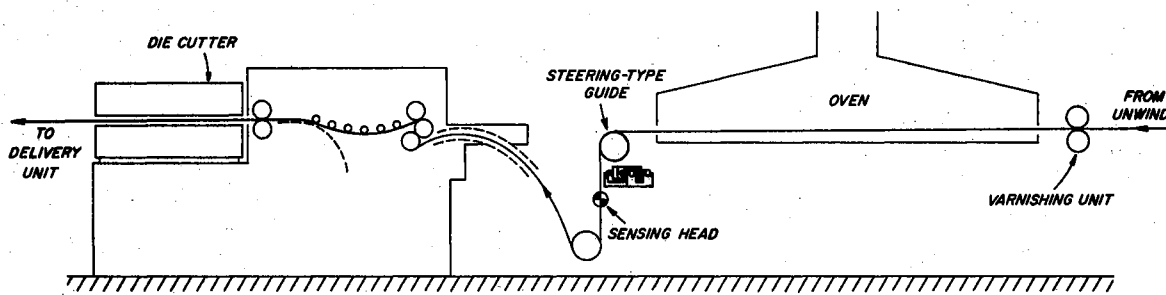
Die Cutter With Steering Guide at Exit From Oven.
